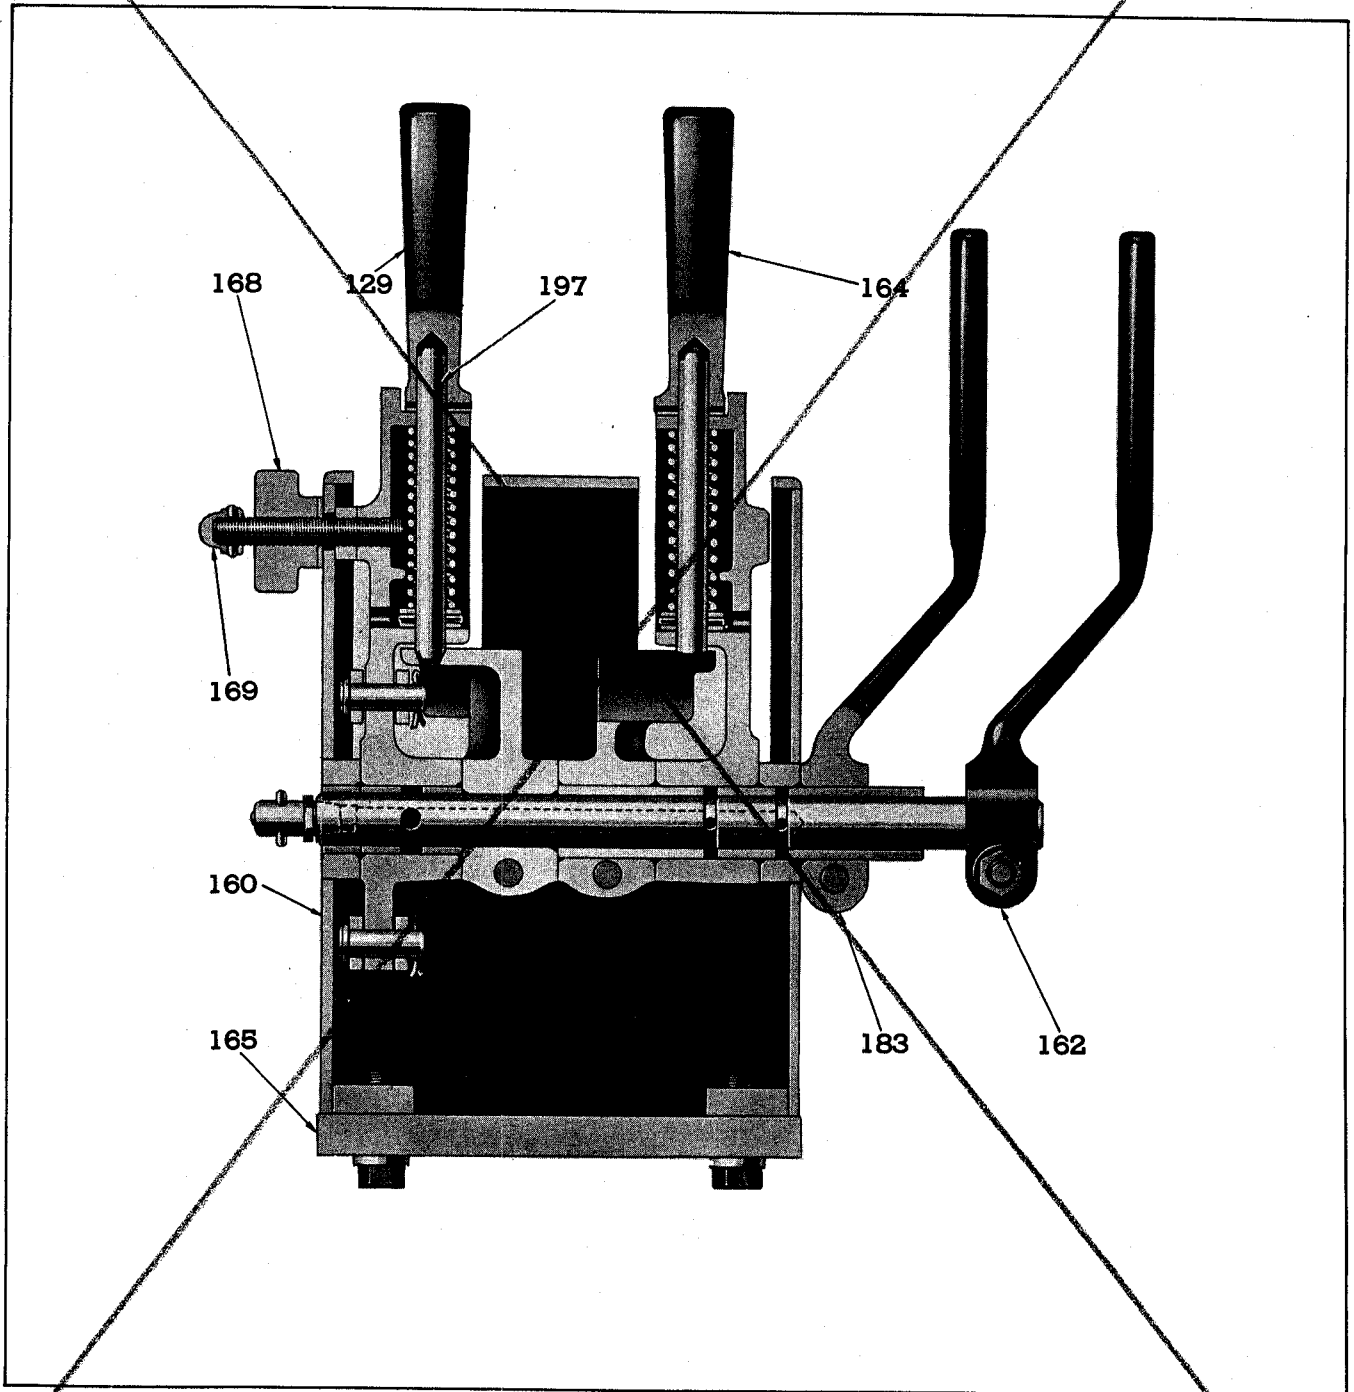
Master Throttle Assembly on a Tandem Twin Unit.
